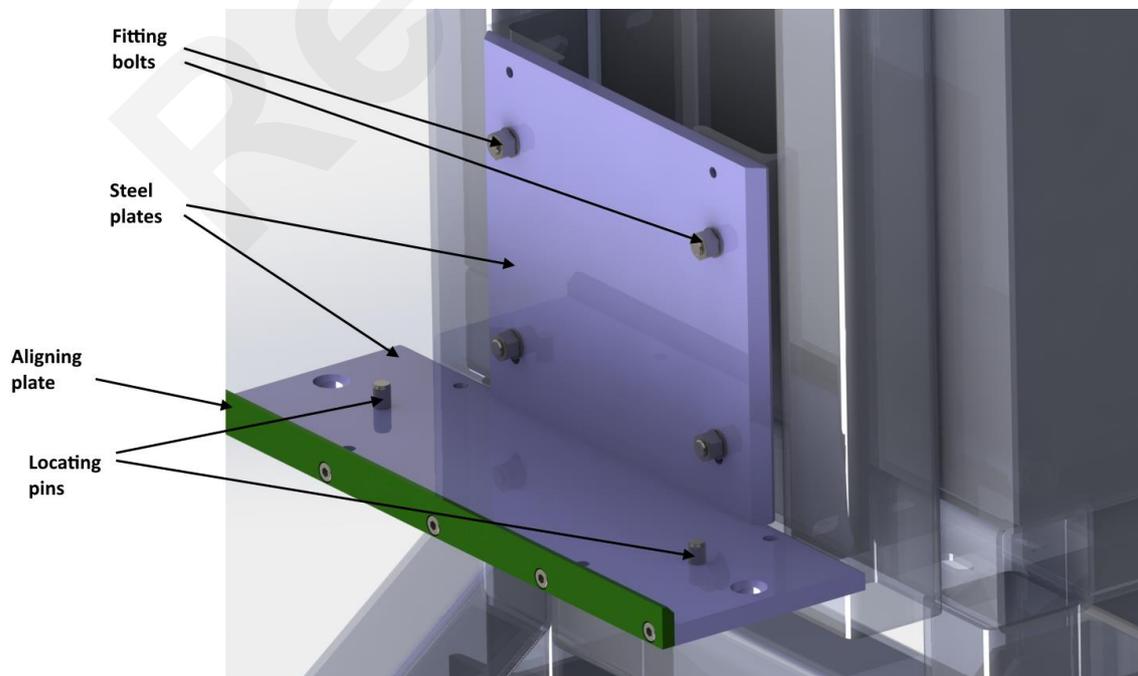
Construction of the mounting unit fixed on the pendulum mechanism.
